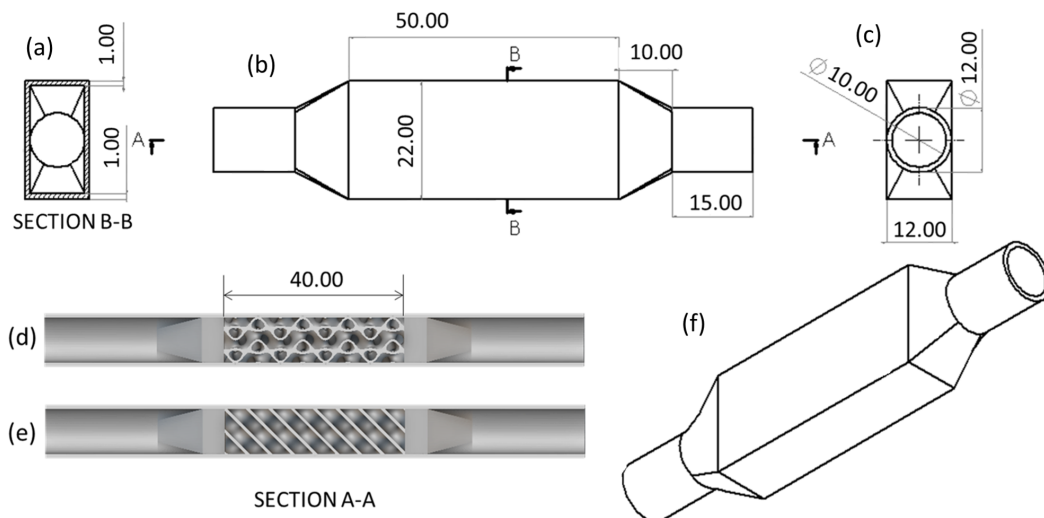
Samples geometry. (a)-(c) Drawing of the envelope and transversal cross-section views, longitudinal cross-section view with (d) the Diamond and (e) the SplitP lattice and (f) the external envelope geometry. Dimensions are in millimeters.
